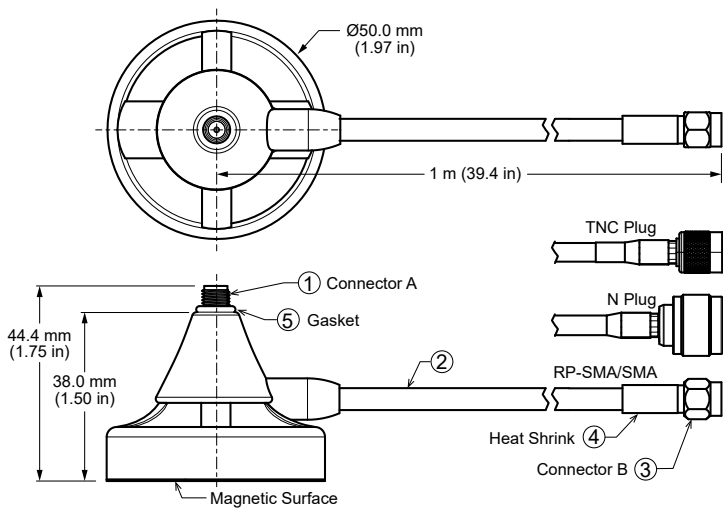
Product Dimensions for the ANT-MAG-RPSF-cccc-1 Cable Assembly
